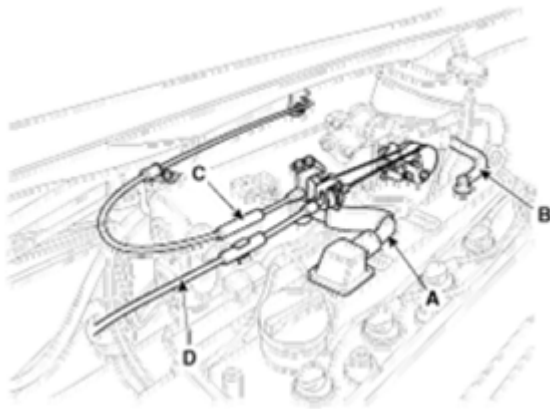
Identifying Accelerator Cable, Auto-Cruise Cable, PCV Hose, & Breather Hose
